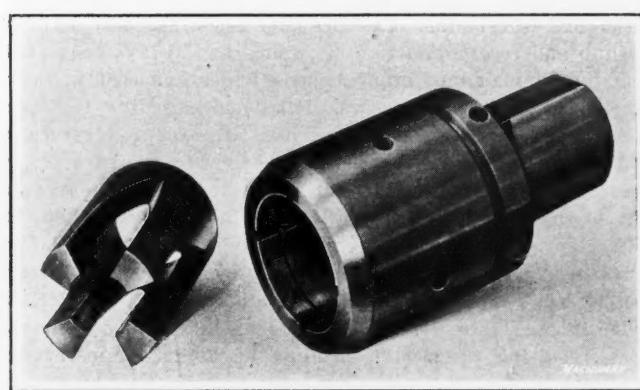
National-Acme Collet Type Spring Screw Threading Die-holder
